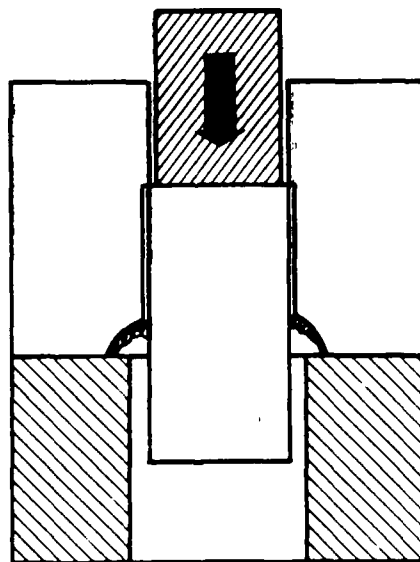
FIXTURE FOR TESTING T-JOINTS AND MODIFIED T-JOINT SPECIMENS
